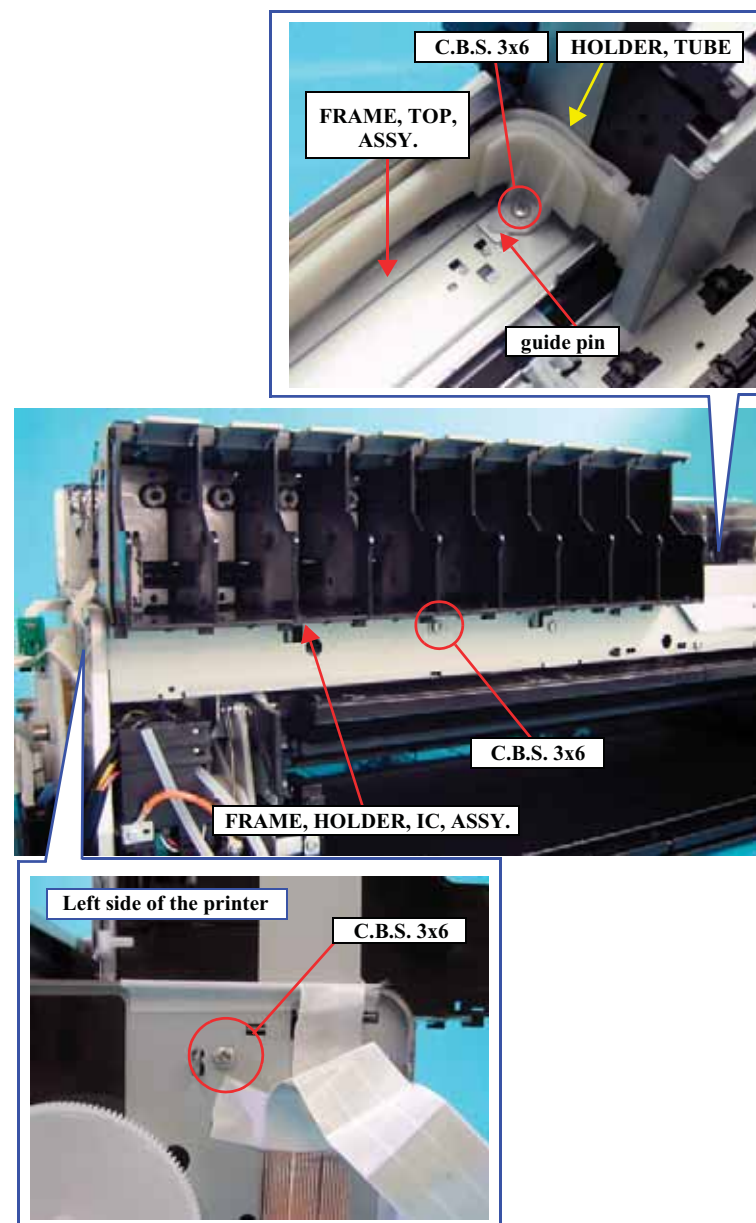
Removing the screws from the FRAME, HOLDER, IC, ASSY.
